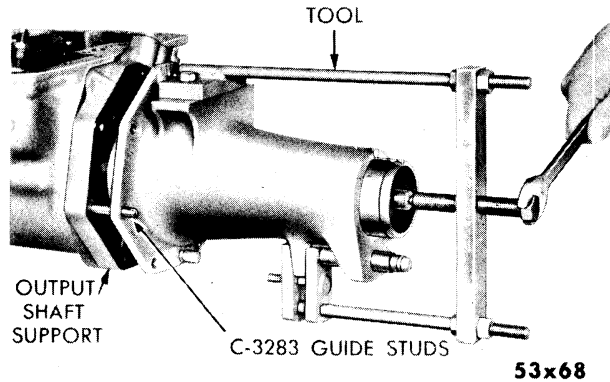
Removing Extension Housing (when Tool C-3282 is Available)
